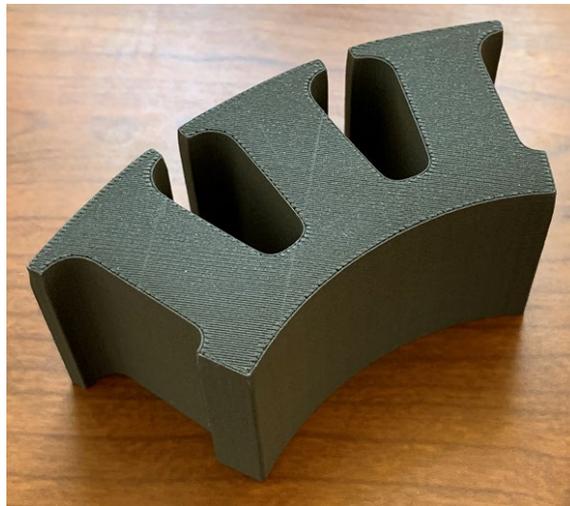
3D printed magnetic composite rotor (1/6 of total rotor design).
